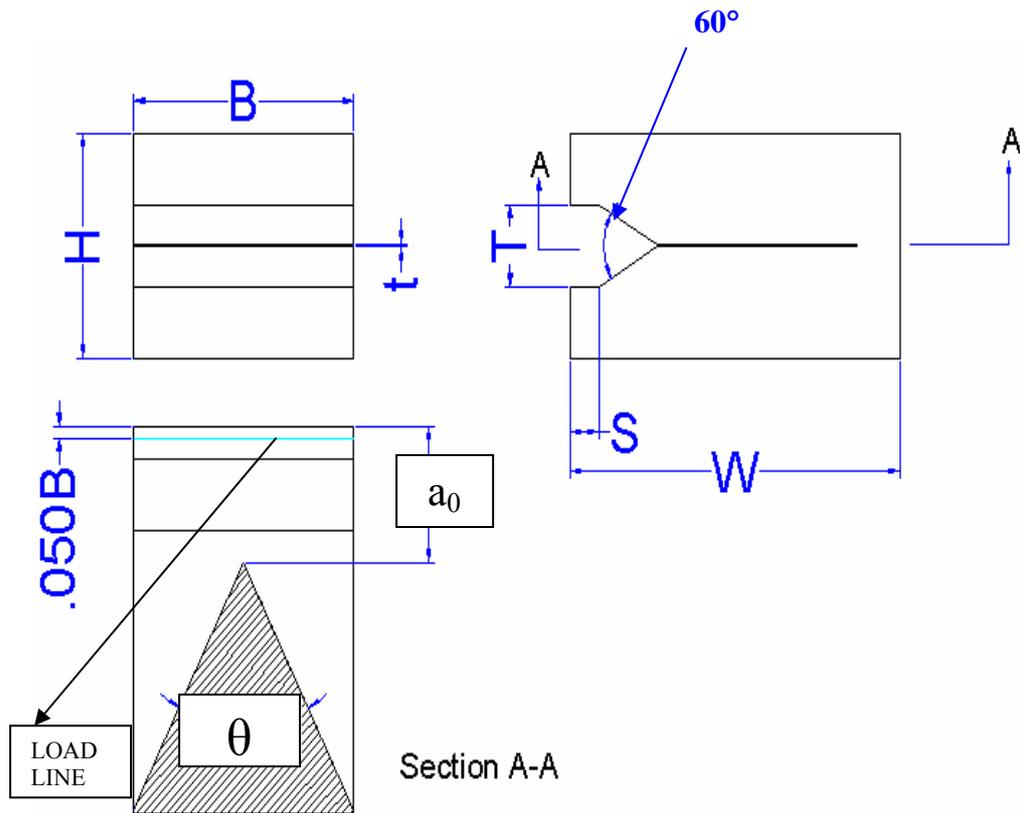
Schematic Drawing of Fracture Toughness Specimens with Edge and Internal Flaws
